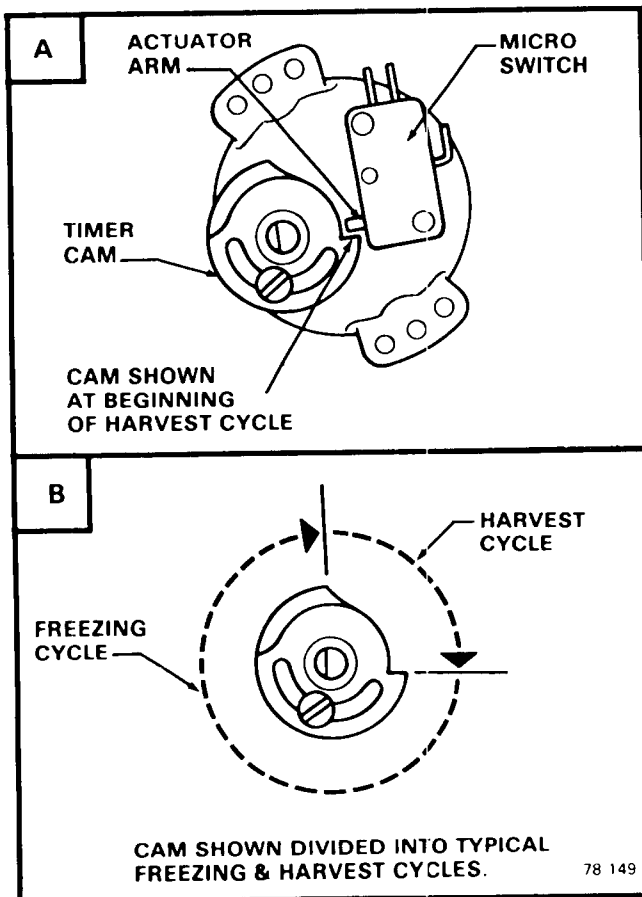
Adjustment of the Timer & Switch Assembly.
